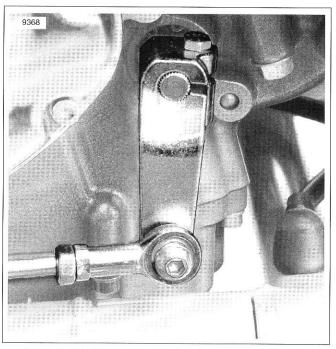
Shifter Arm Perpendicular to Frame Rail
